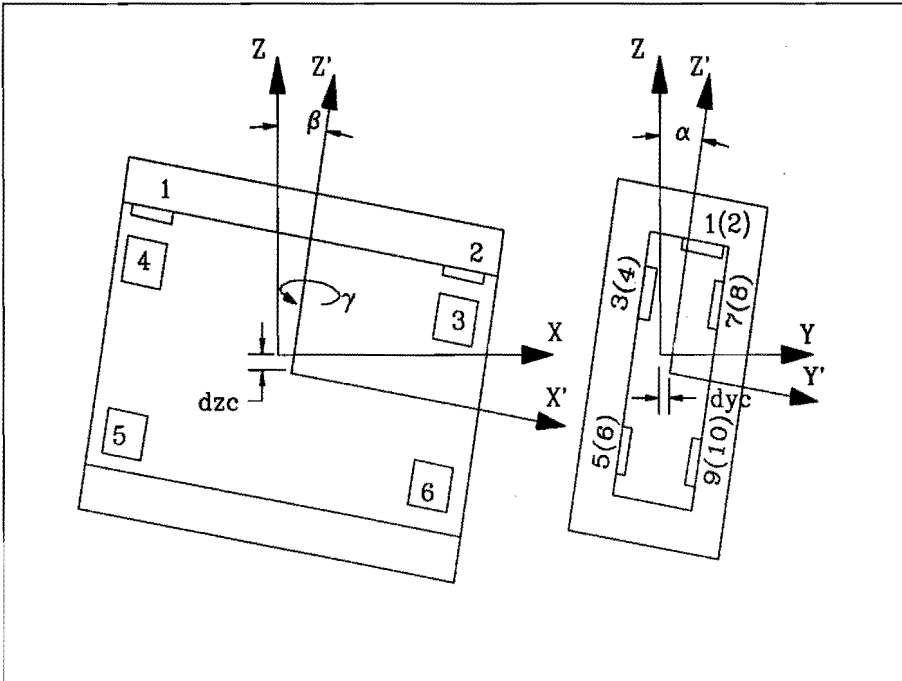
An example of a linear guide with EPG bearings with the definition of coordinates and bearing gap height
